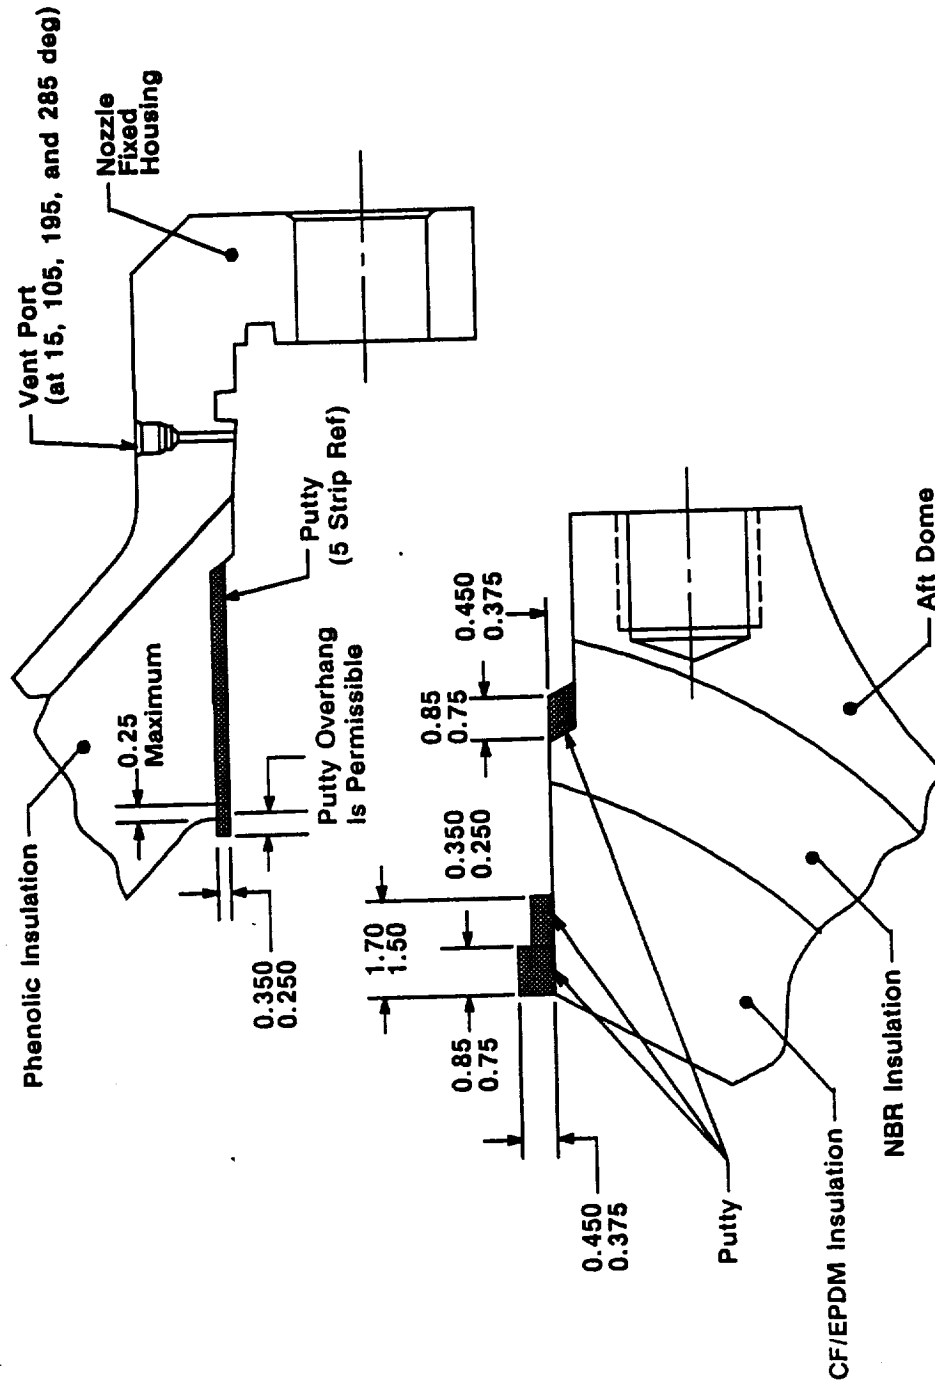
TEM-7 (HPM modified) Case-to-Nozzle Joint Configuration—Putty Layout
